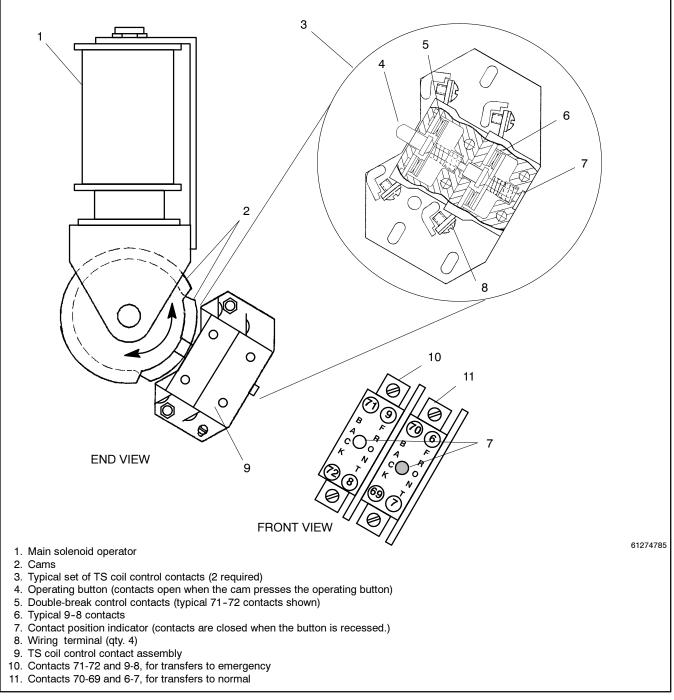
TS Coil Control Contact Locations with Main Solenoid Operator
